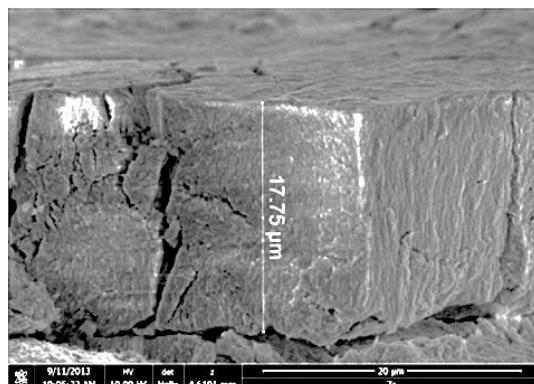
Fractography images of the fracture of the coating formed on Zr1%Nb alloy at 700 °C
